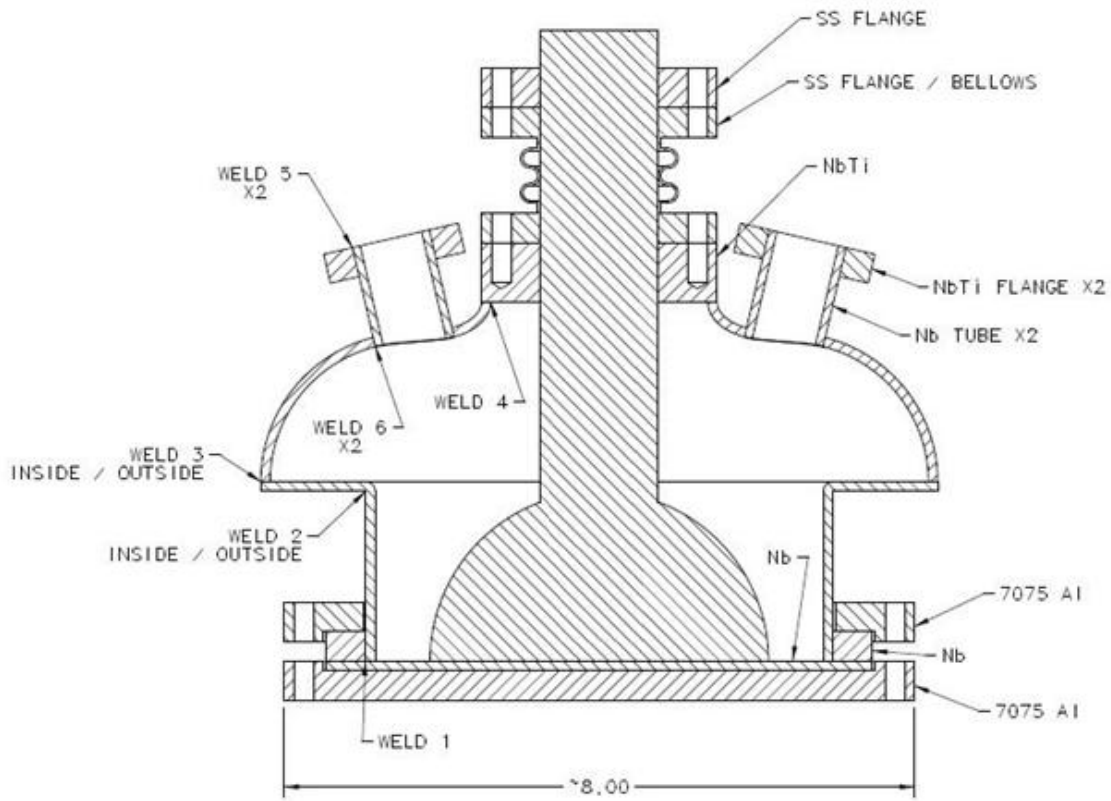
Mechanical drawing of the Wafer Test Cavity indicating materials used for each piece and order of the welds.
